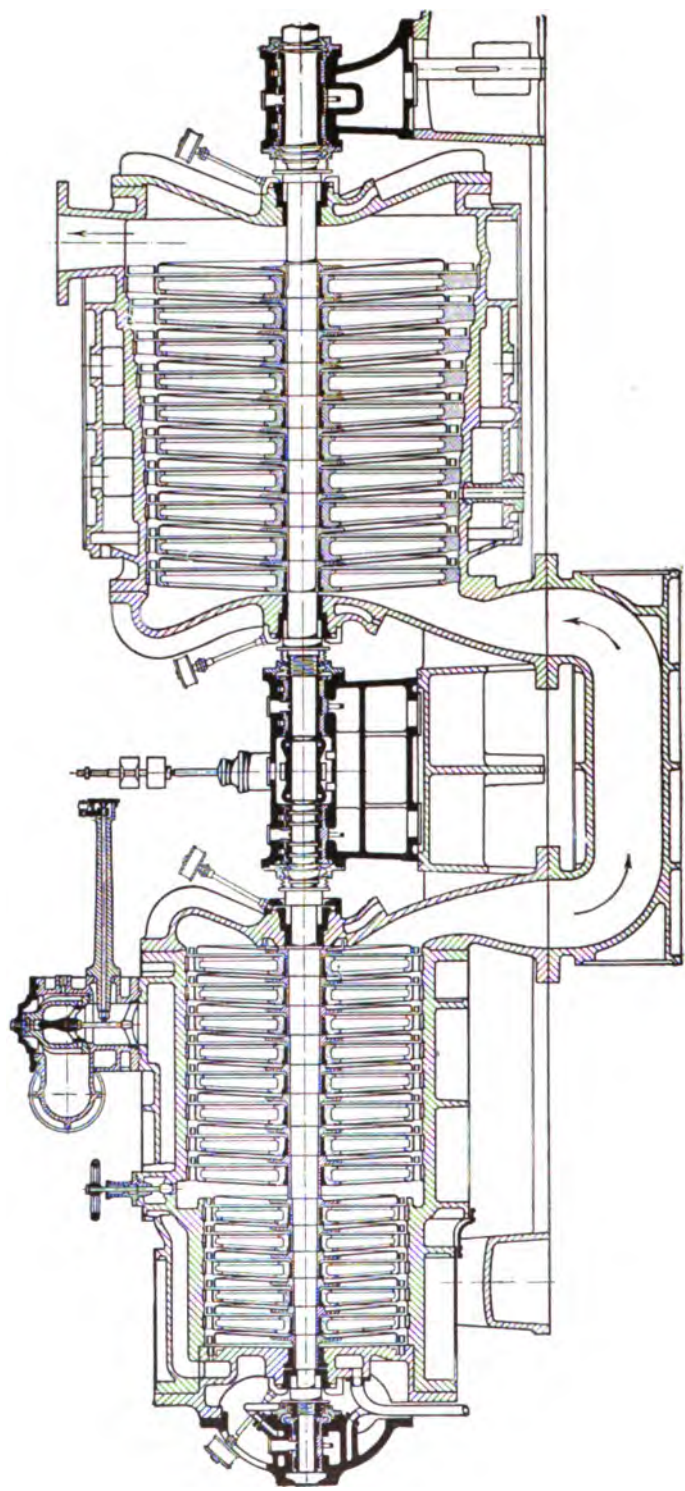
Rateau Turbine with Separate Cylinders as Manufactured by Sautter, Harlé and Co., Paris.
